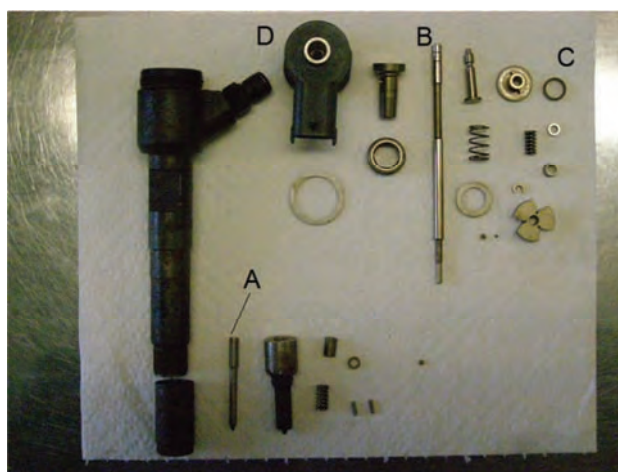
Electromagnetic Bosch fuel injectors. A – precision element on injector needle, B – fuel injector steering valve, C – valve sealer, D – fuel injector coil
